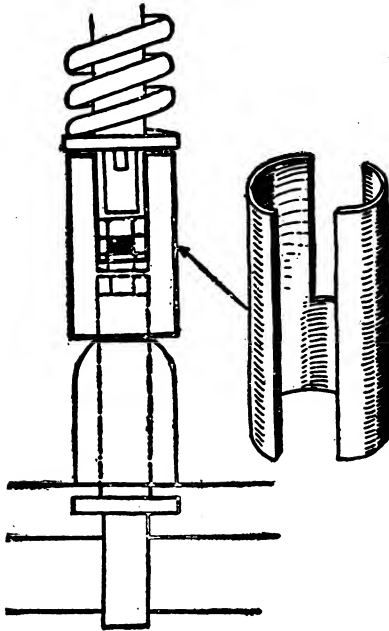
Substitute for a Valve Spring Remover Which Pushes Spring away as Motor is Turned
